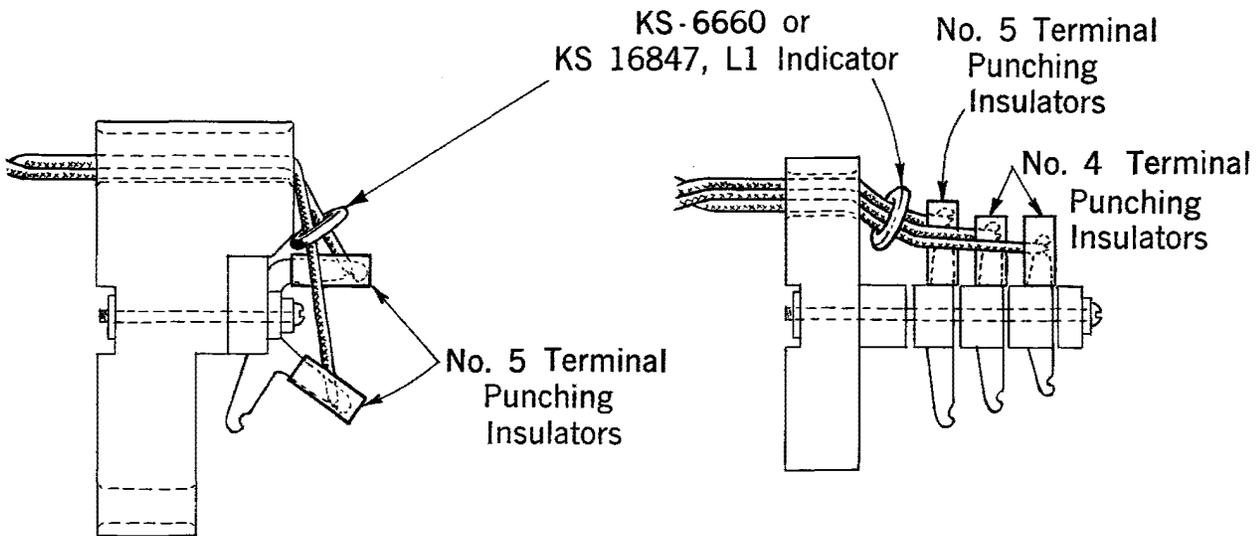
Indicator and Terminal Punching Insulators on Terminal Strips
